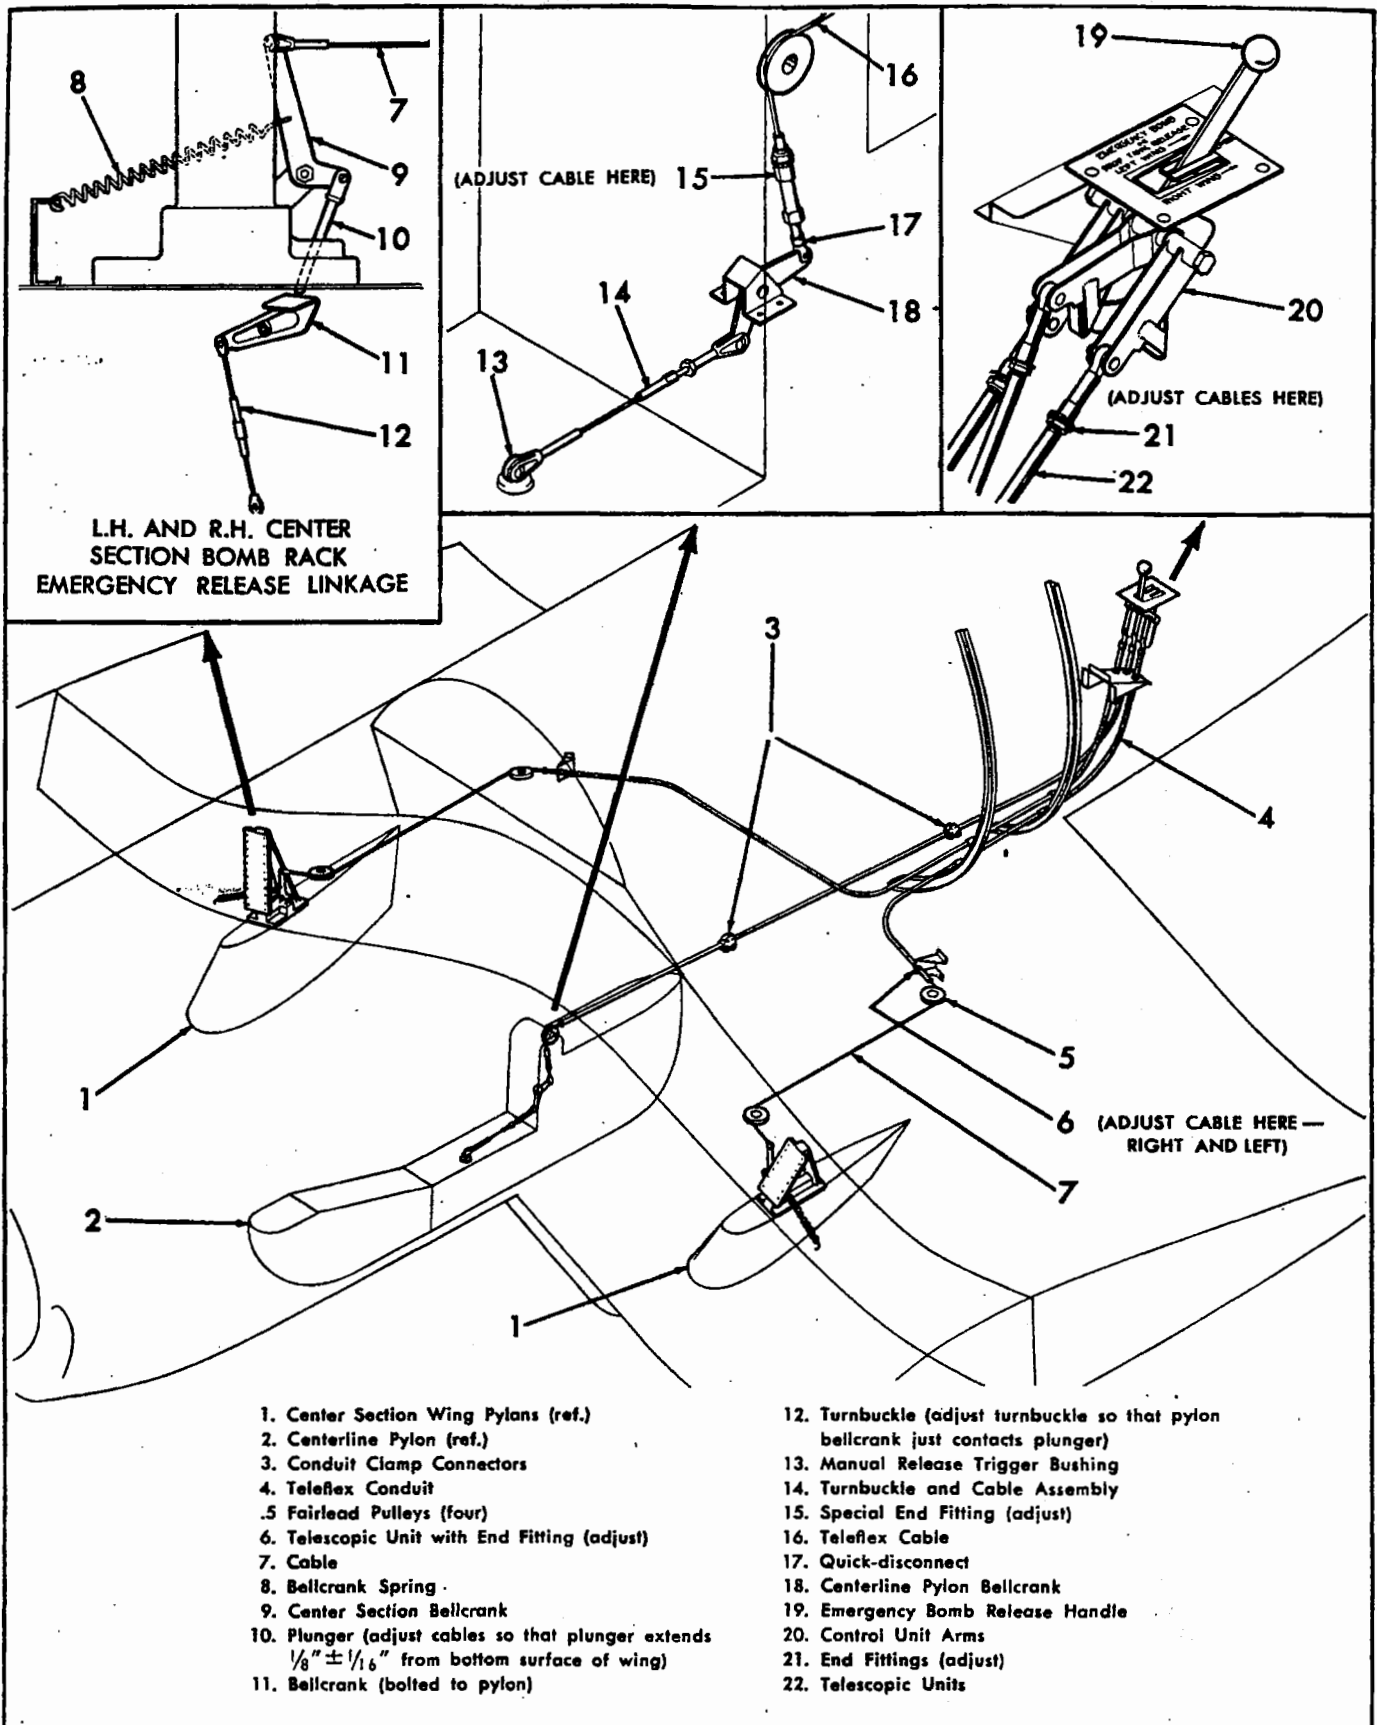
Emergency Bomb and External Fuel Tank Manual Release System.
